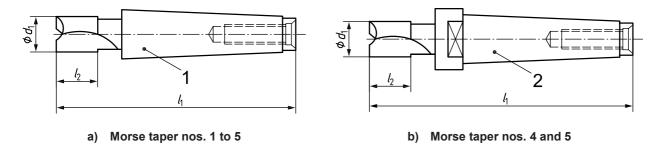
Dimensions of flat-ended end mills and ball-nosed cylindrical end mills
